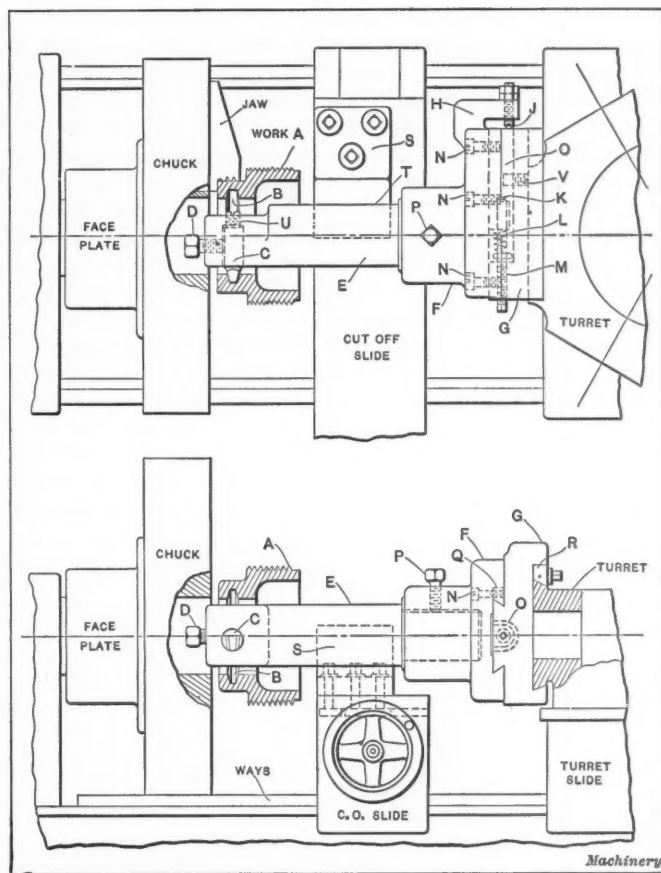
A Recessing Tool for an Automobile Bearing Retainer
